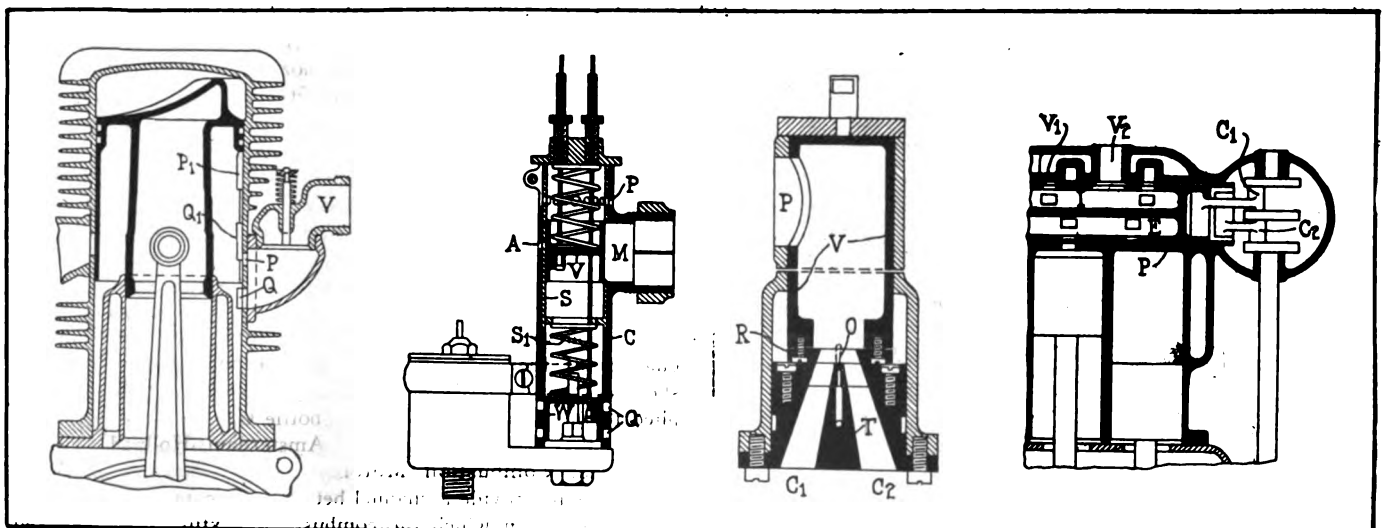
Sangster internal combustion motor. Fig. 7—Mackay carbureter. Fig. 8—Barrett carbureter. Fig. 9—Rochet-Schneider motor
